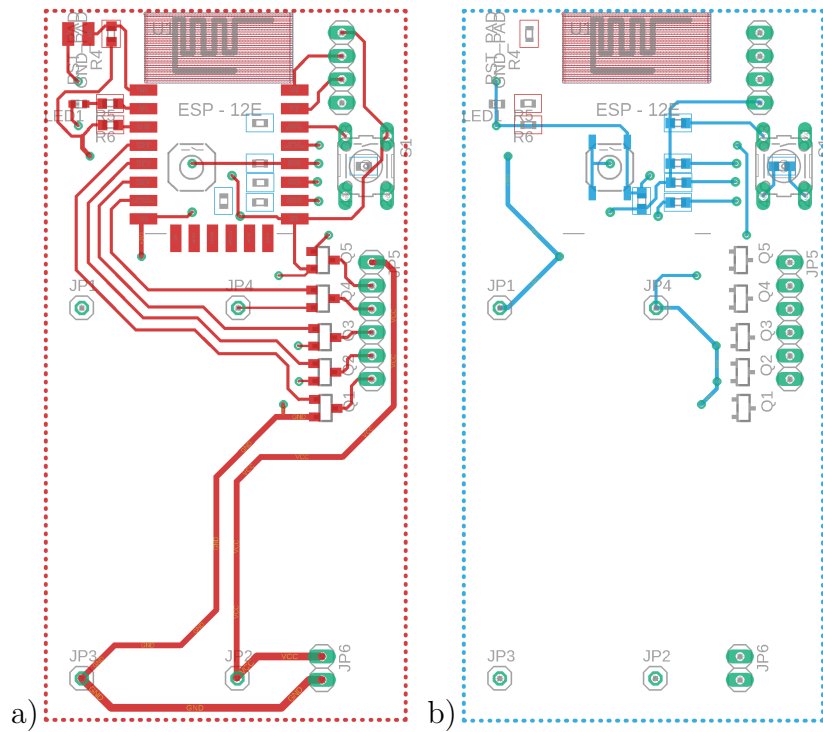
PCB design of led controller module a) Top layer b) Bottom layer
